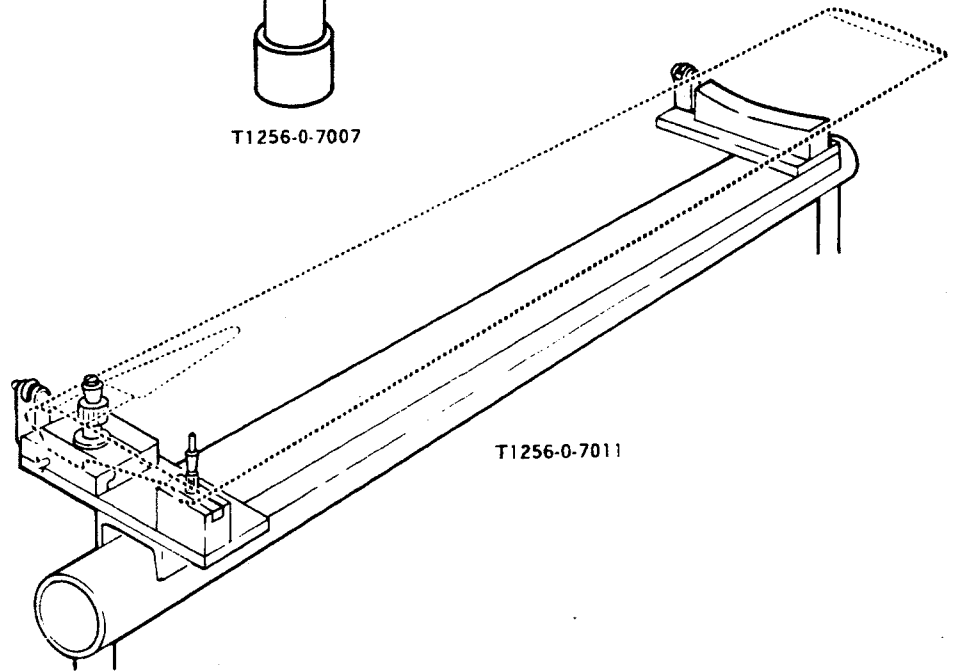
Special Tools and Equipment (Sheet 2 of 6)
